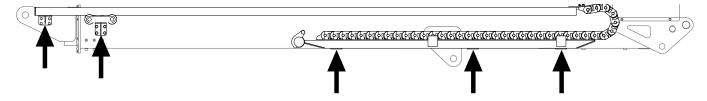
Fastening bolts on drag chain assembly -GTZZ16EJ
